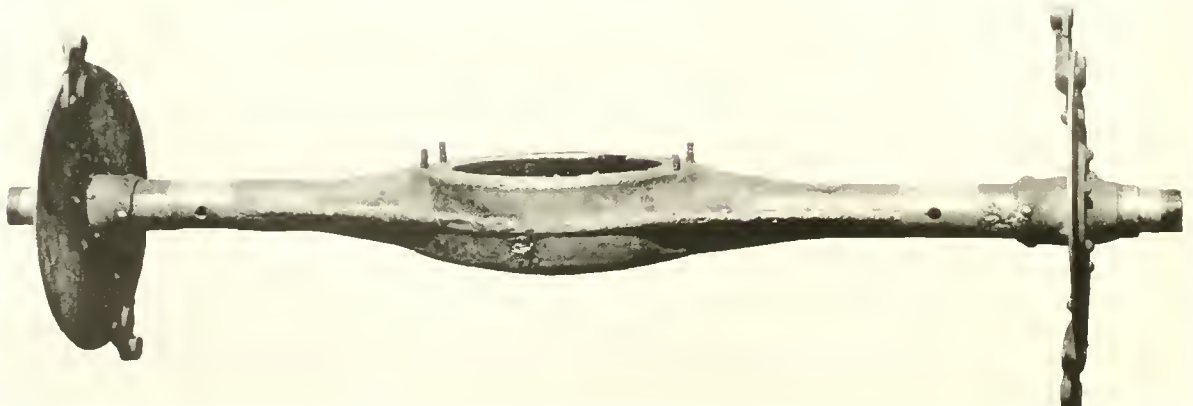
Electric Arc Welded Automobile Rear Axle Housing
